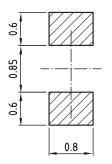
Issue: 2; 10.07.06 19044
